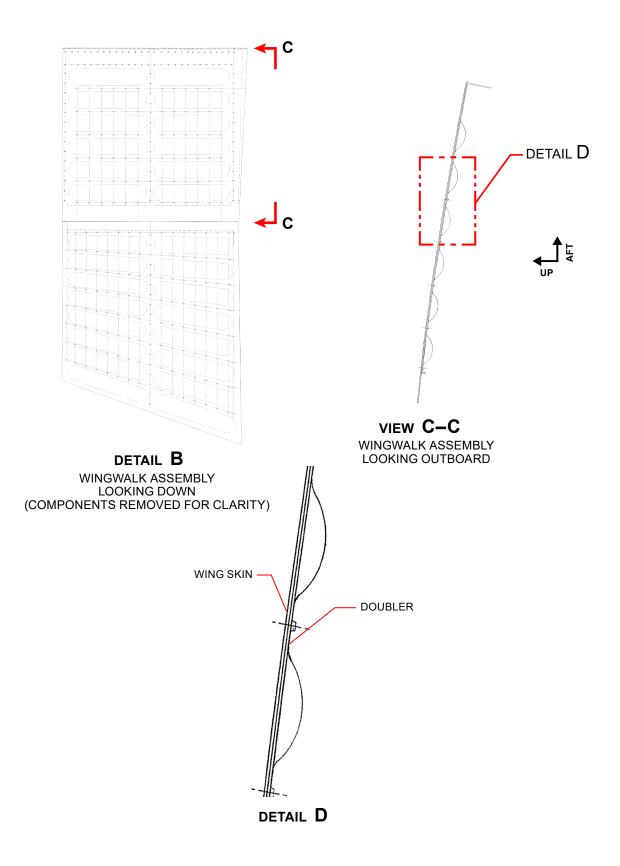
(Sheet 2 of 2) Wingwalk Inspection Areas
